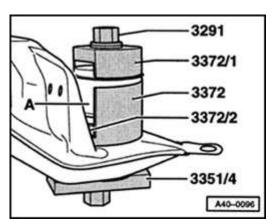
Pulling In Front Bonded Rubber Mounting Courtesy of VOLKSWAGEN UNITED STATES, INC.
